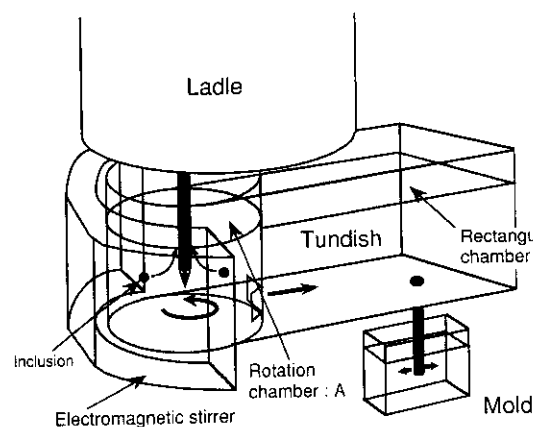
Equipment of the centrifugal flow tundish in continuous casting
